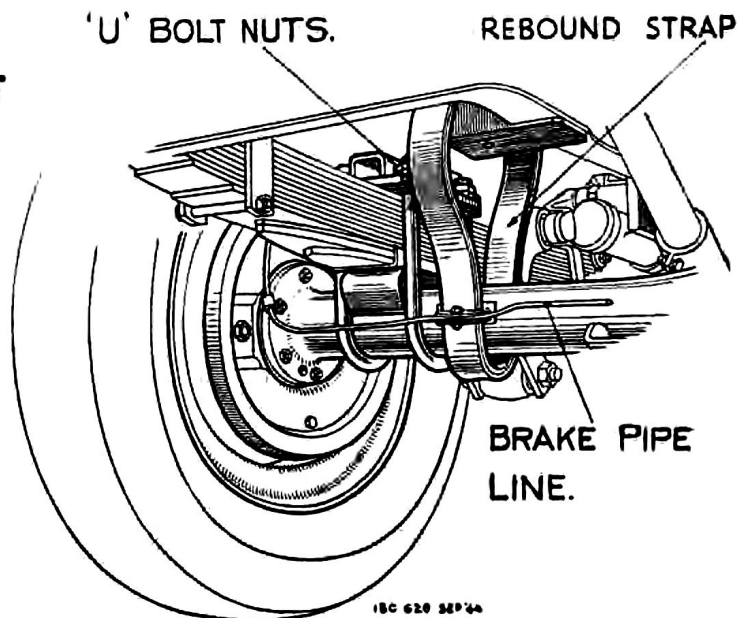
REAR AXLE, SHOWING REBOUND STRAP.
